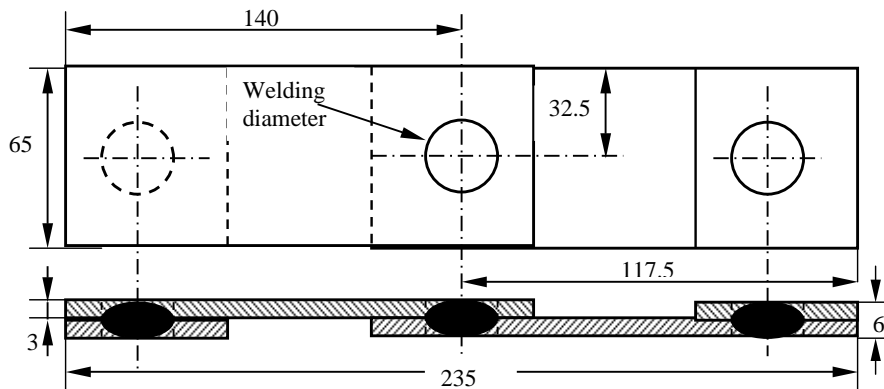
The spot-welded test sample for testing in Mode II (dimensions in mm) [19, 20].
